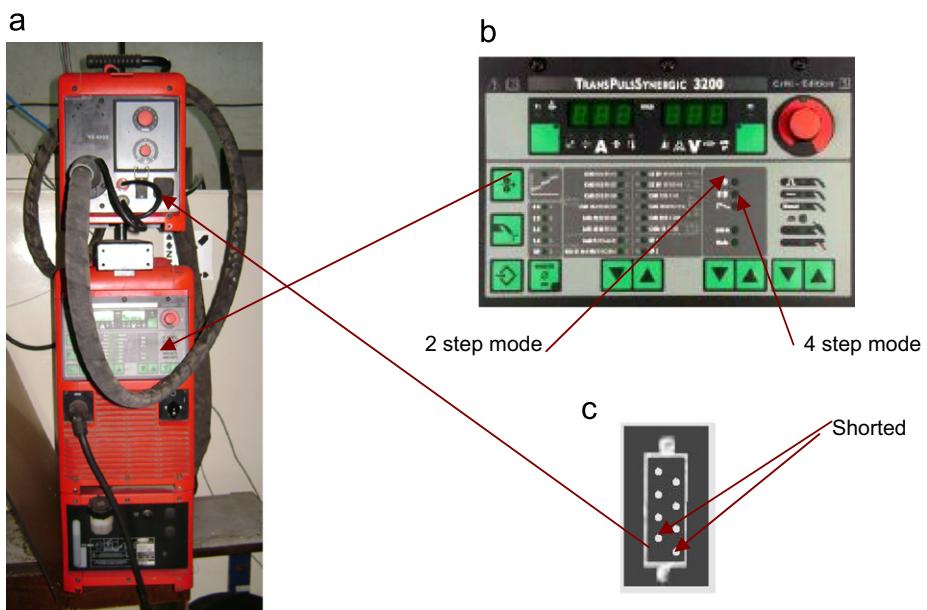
Control of weld-deposition unit. (a) GMAW power source, (b) Control Panel of the Welding Unit and (c) Connector for Automatic Control of Welding.
